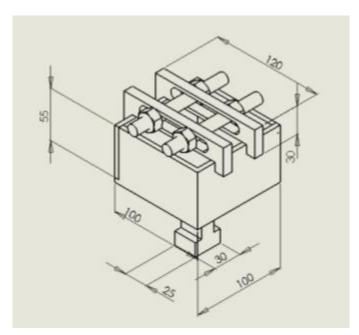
Design Alternative 5 - Metal box with guiding rails (all dimensions are in millimeters)
